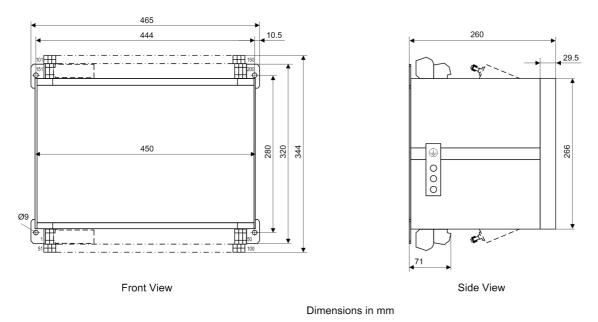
Dimensions of a device for panel flush mounting or cubicle installation (size 1/1)
